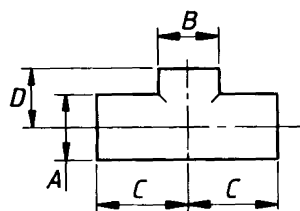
Plain end tee for slip-on type coupling and butt-welded joint
